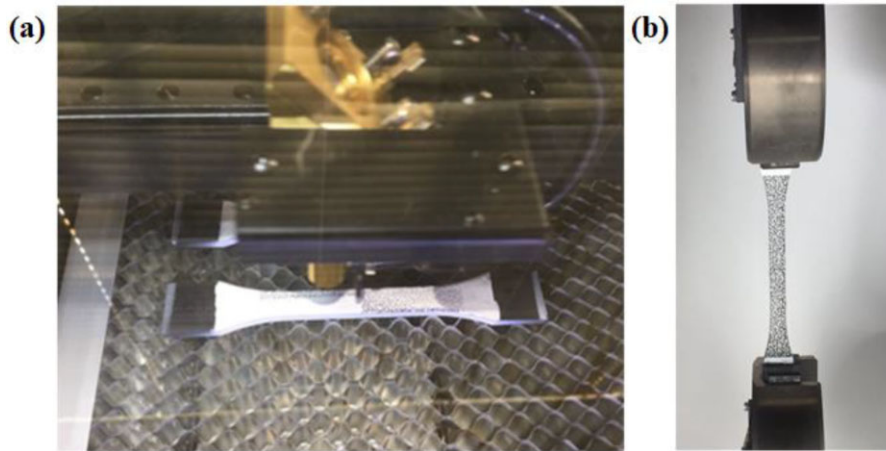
(a) Schematic of making speckle pattern using laser cutting machine (b) An example of tensile specimen.
